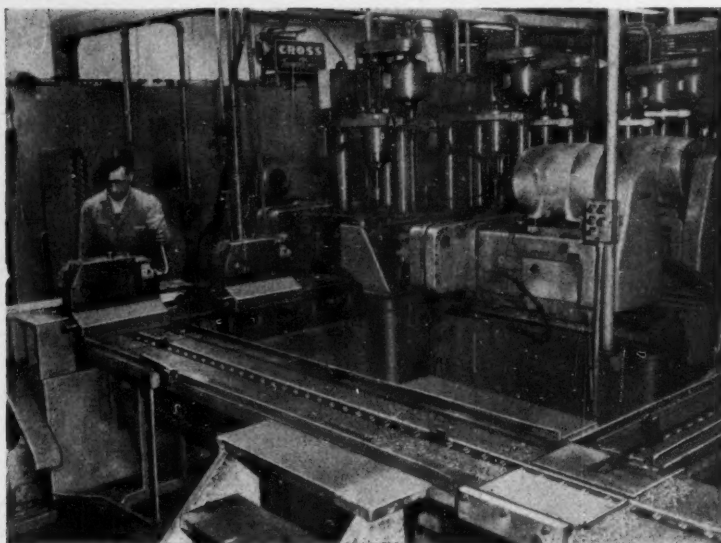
General View of the Cross Atlantic In-line Transfer Machine for Operations on Rear Extension Castings, Showing Part of the Pallet Return Track and, at the Left, the Loading Station
